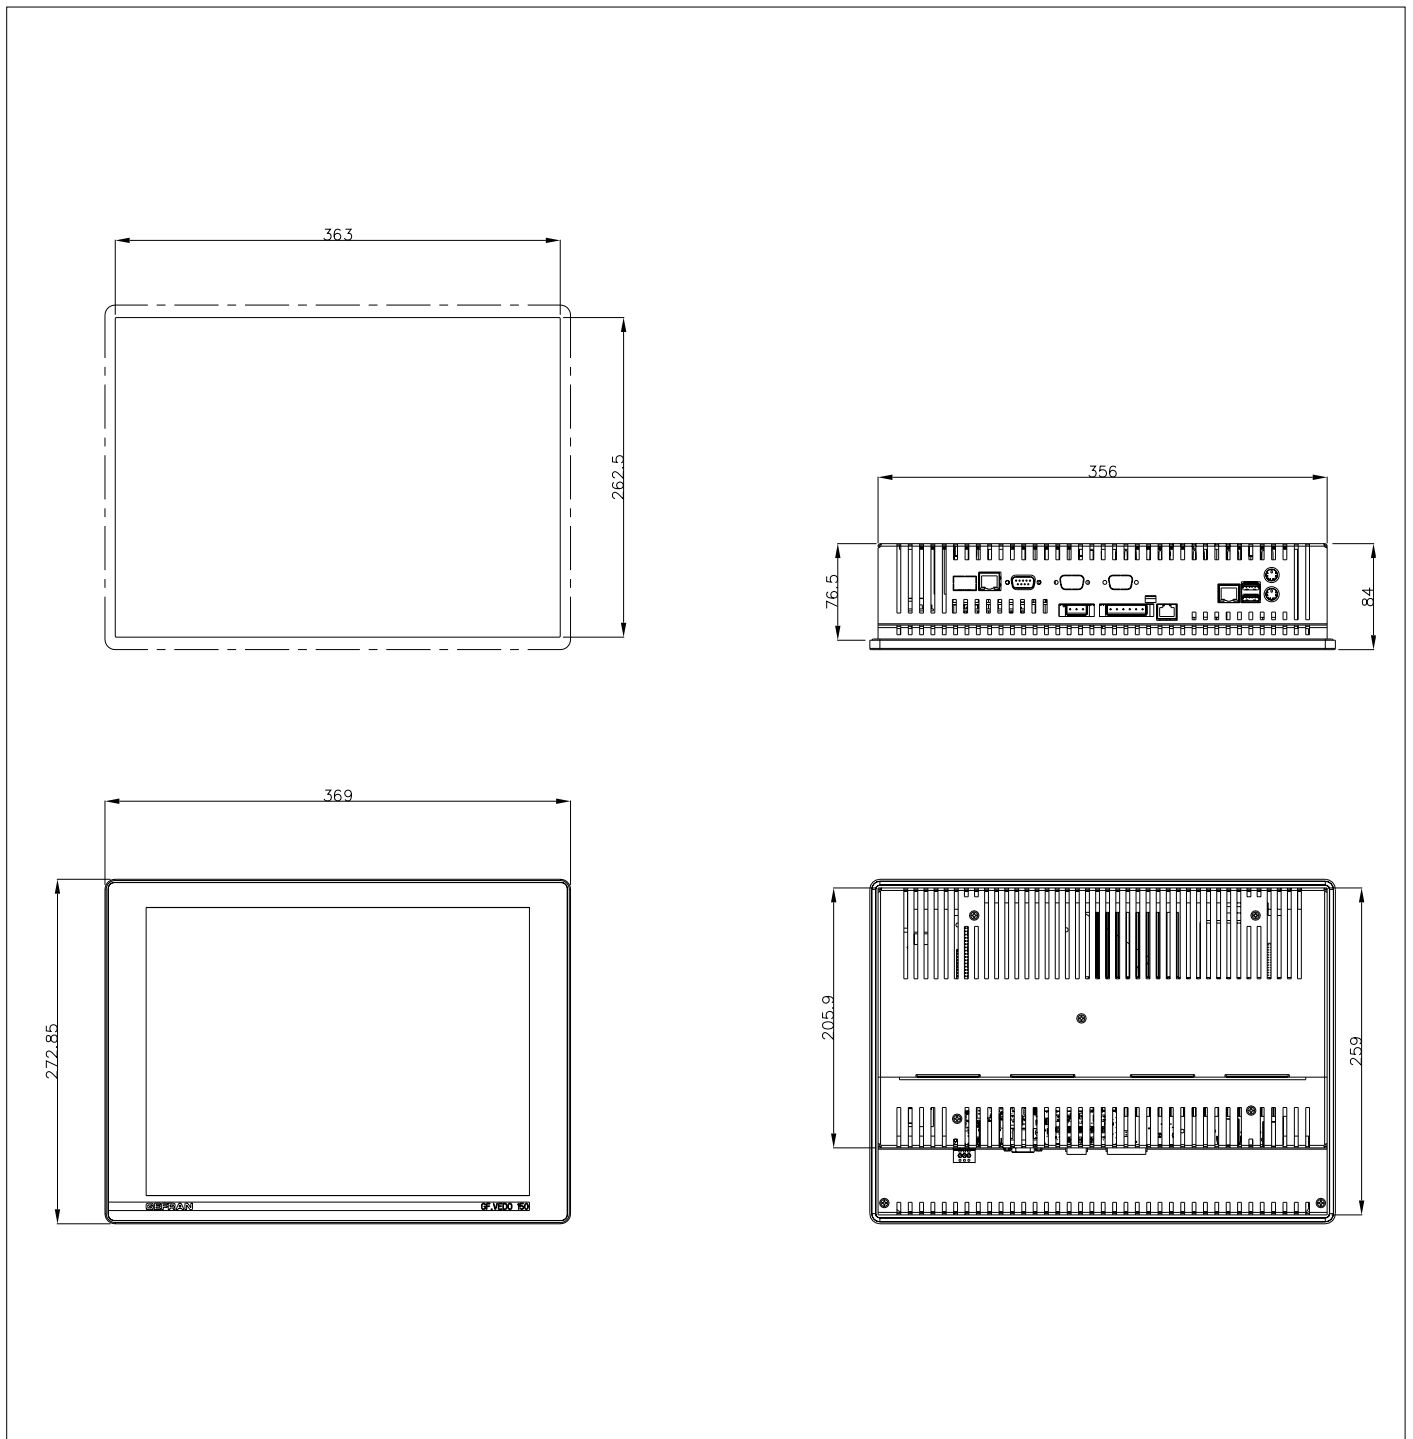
Dimensions and cut-out GF\_VEDO HL 150CT
